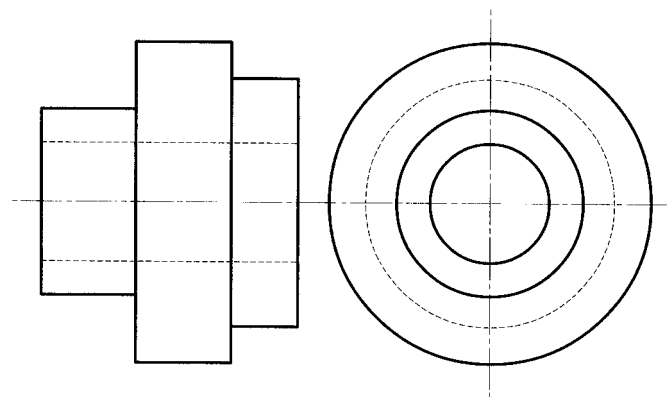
First angle drawing of a cylindrical component: the elevation and plan views are the same and need only be drawn once
